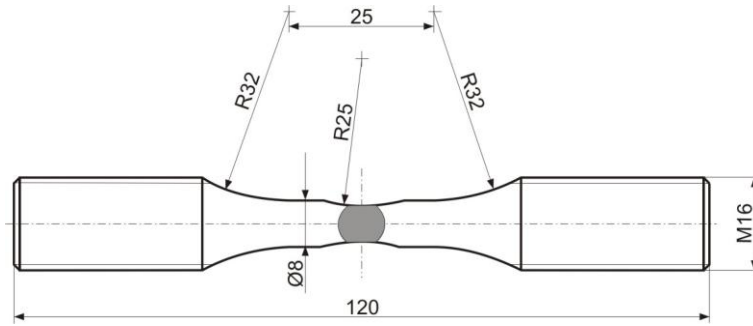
Drawing of specimen used for fatigue crack initiation study (Dimensions are in mm).
